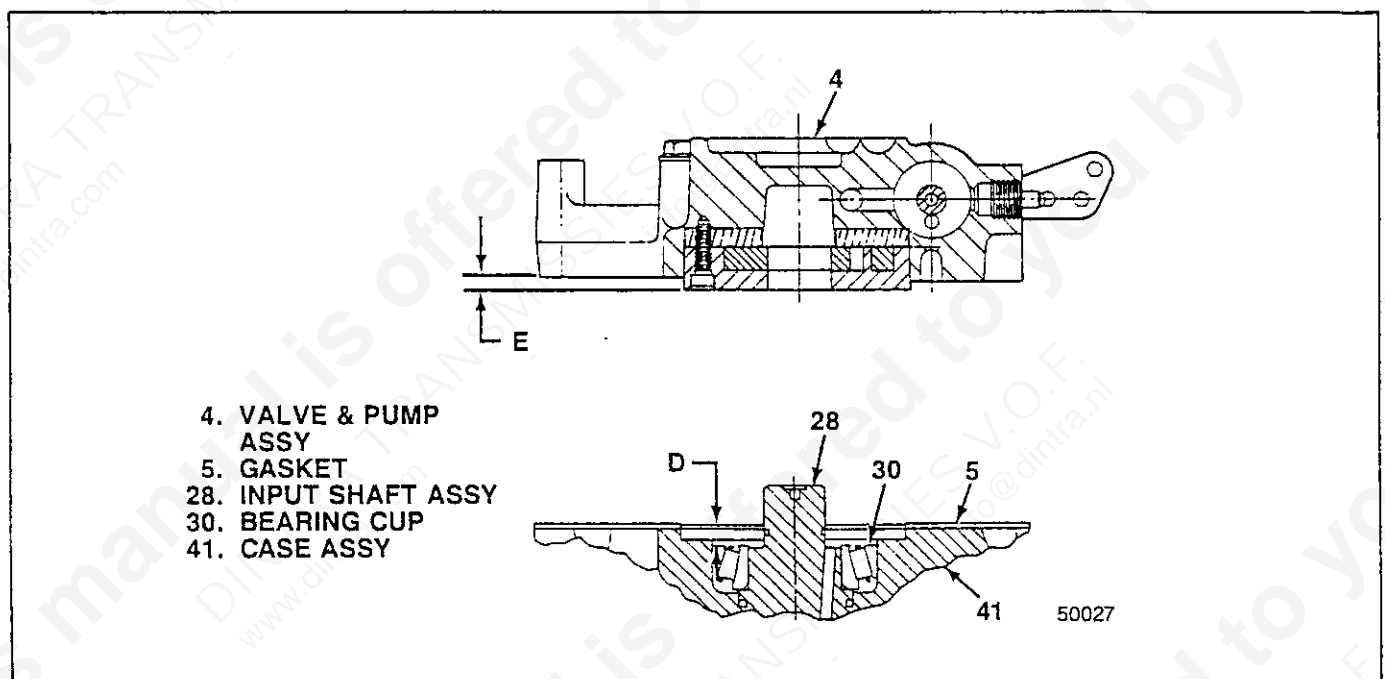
Determining Input Shaft Bearing Shim Thickness
